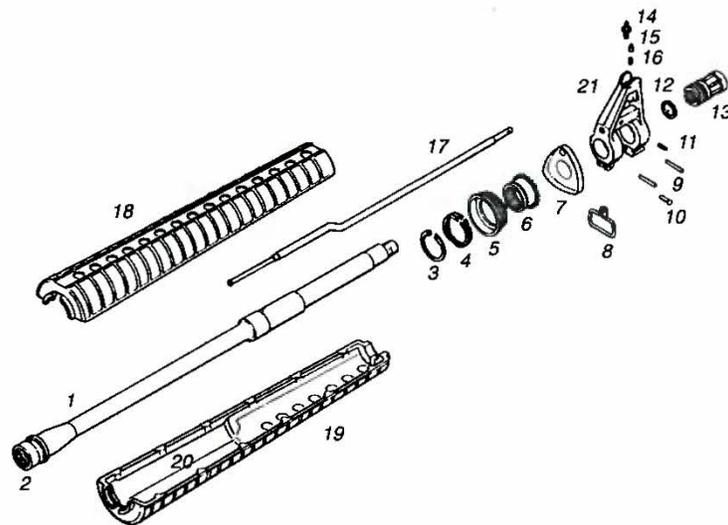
M16/AR15 barrel assembly. 1) barrel, 2) barrel extension, 3) handguard retaining ring, 4) slip ring springs (4), 5) handguard slip ring, 6) barrel nut, 7) handguard cap, 8) sling swivel, 9) front sight taper pins, 10) swivel rivet, 11) gas tube pin, 12) compensator spacer or washer, 13) compensator, 14) front sight post, 15) front sight detent, 16) detent spring, 17) gas tube, 18) upper handguard, 19) lower handguard, 20) handguard heat shield, 21) front sight.
